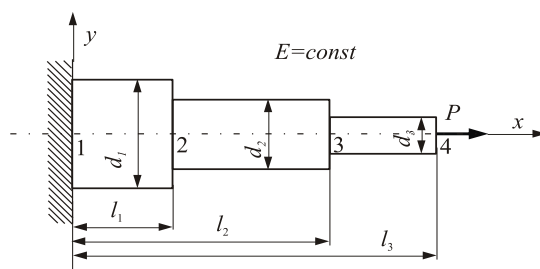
Illustration of a stepped bar in tension; the dimensions are marked.
